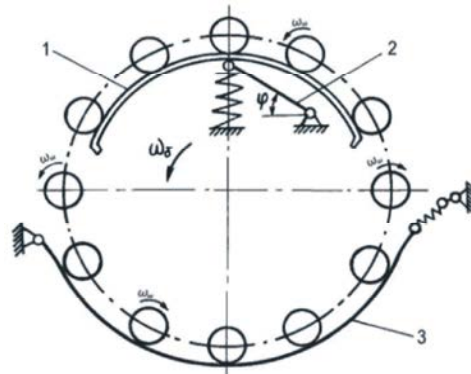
The pilot scheme of experimental mechanism of drive spindle (1-reverse rotation pad; 2 - batteries link; 3-direct-belt rotation.)
